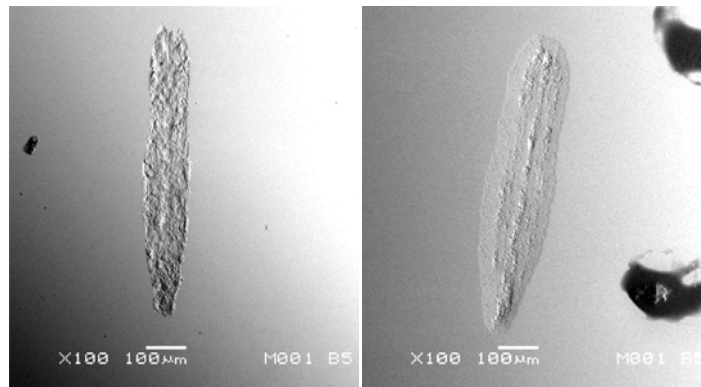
Inner race spalls of hybrid bearings with “large” scars on only 2 balls in each bearing. First failure occurred after 120 hours (left), and second failure occurred after 668 hours (right).
